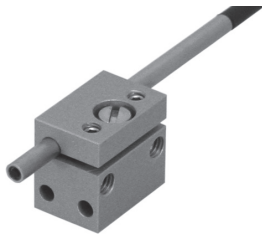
Outer clamps with MA2402 for IFS2402 sensors
